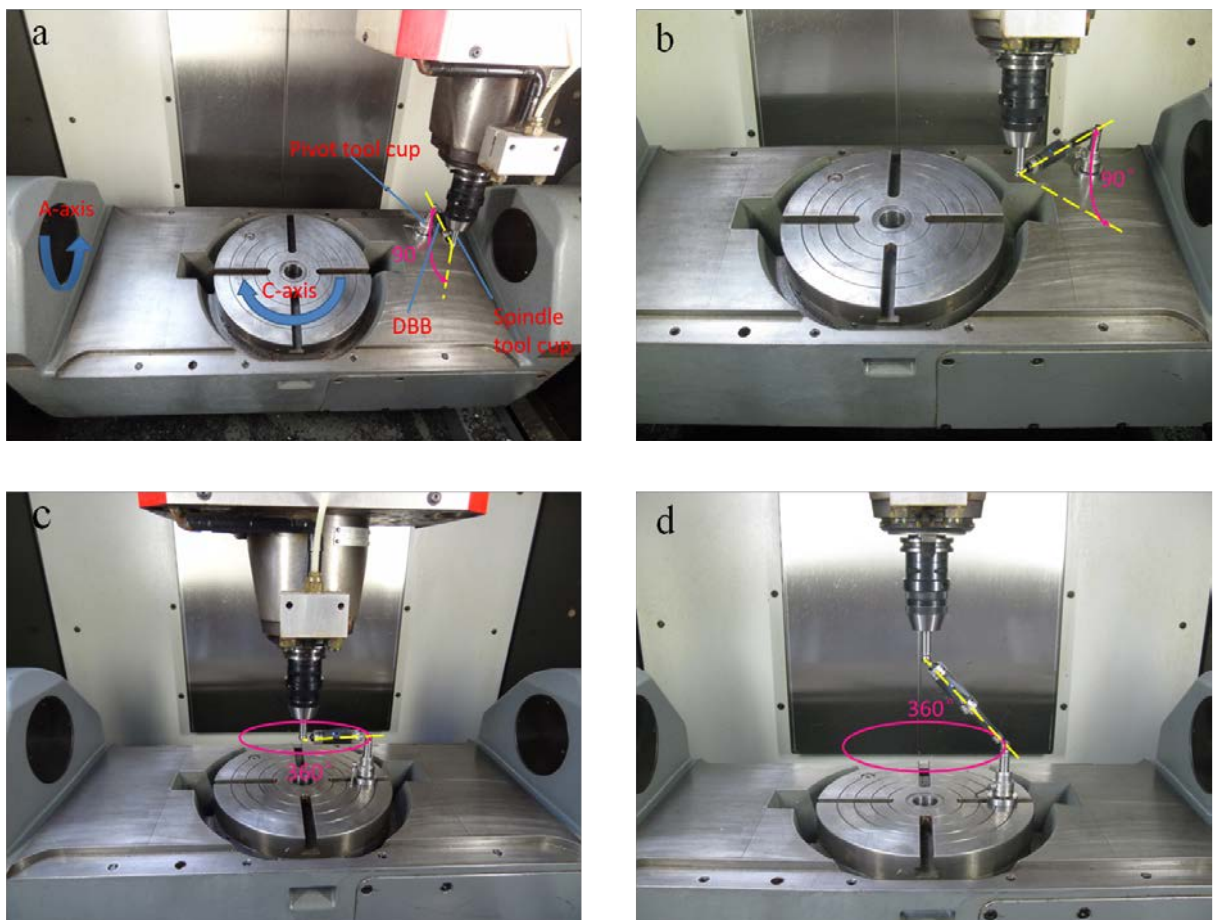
4 stage rotary axes test set-up on a 5-axis machine tool. (a) A-axis test without an extension bar. (b) A-axis test with an extension bar. (c) C-axis test without an extension bar. (d) C-axis test with an extension bar.
